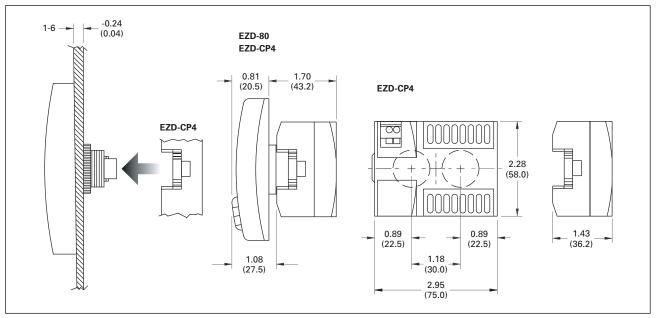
EZD-CP4, EZD-80 and EZD-CP4 Series Combined Dimensions in Inches (mm), Drawing Number MD013013E
